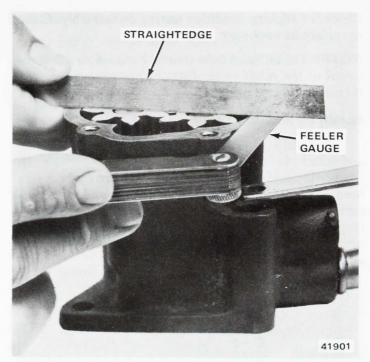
B-96 Oil Pump Gear End Clearance Measurement— Feeler Gauge Method
